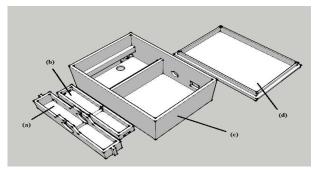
SketchUp drawing of the hardware layout. The illustrated parts included compartment for (a) drop counter, (b) air detector, (c) circuitry system and (d) cover.
